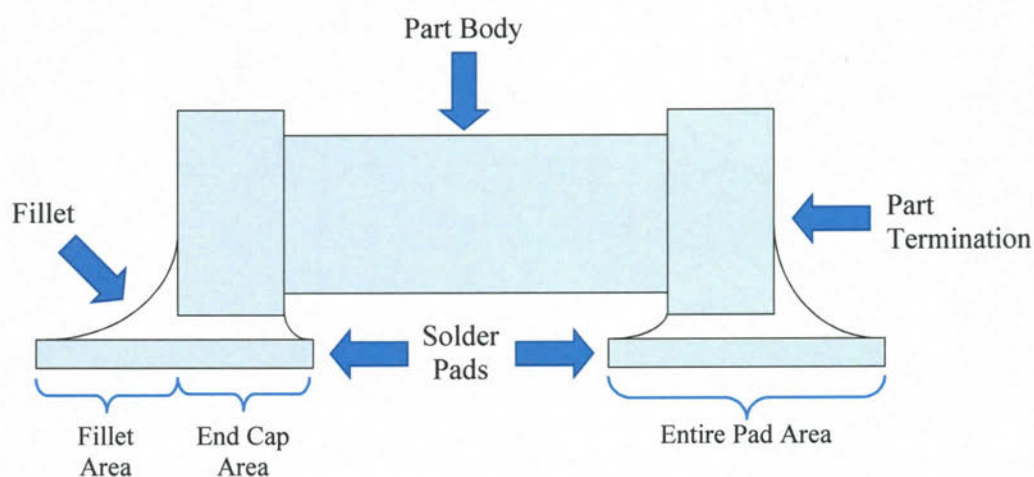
Cross sectional representation of a chip joint – Side View
